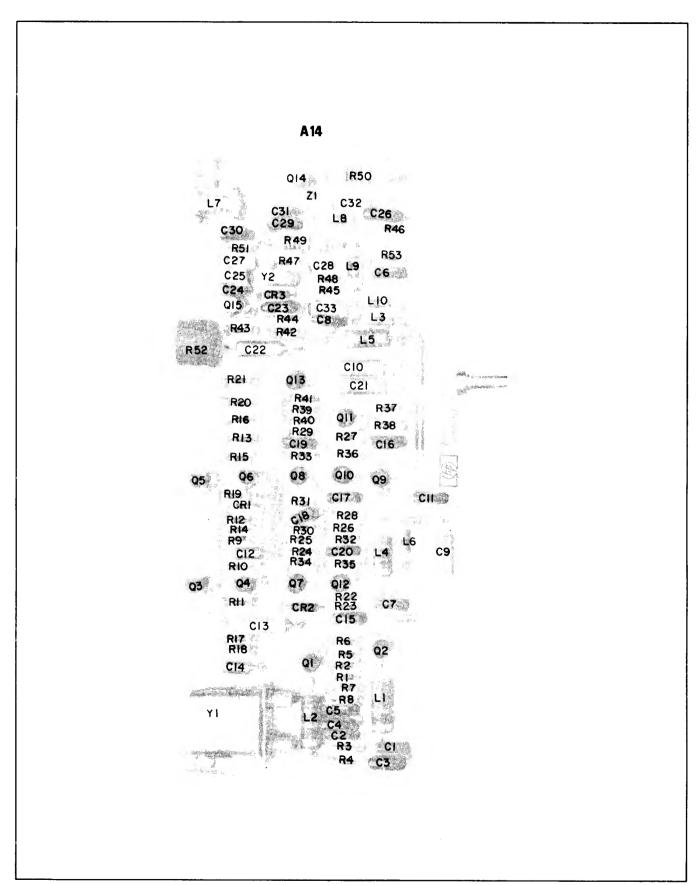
Parts Location for Phase-Locked Oscillator A14 (Change E, Serial No. 948-00176 thru 983-00445)
